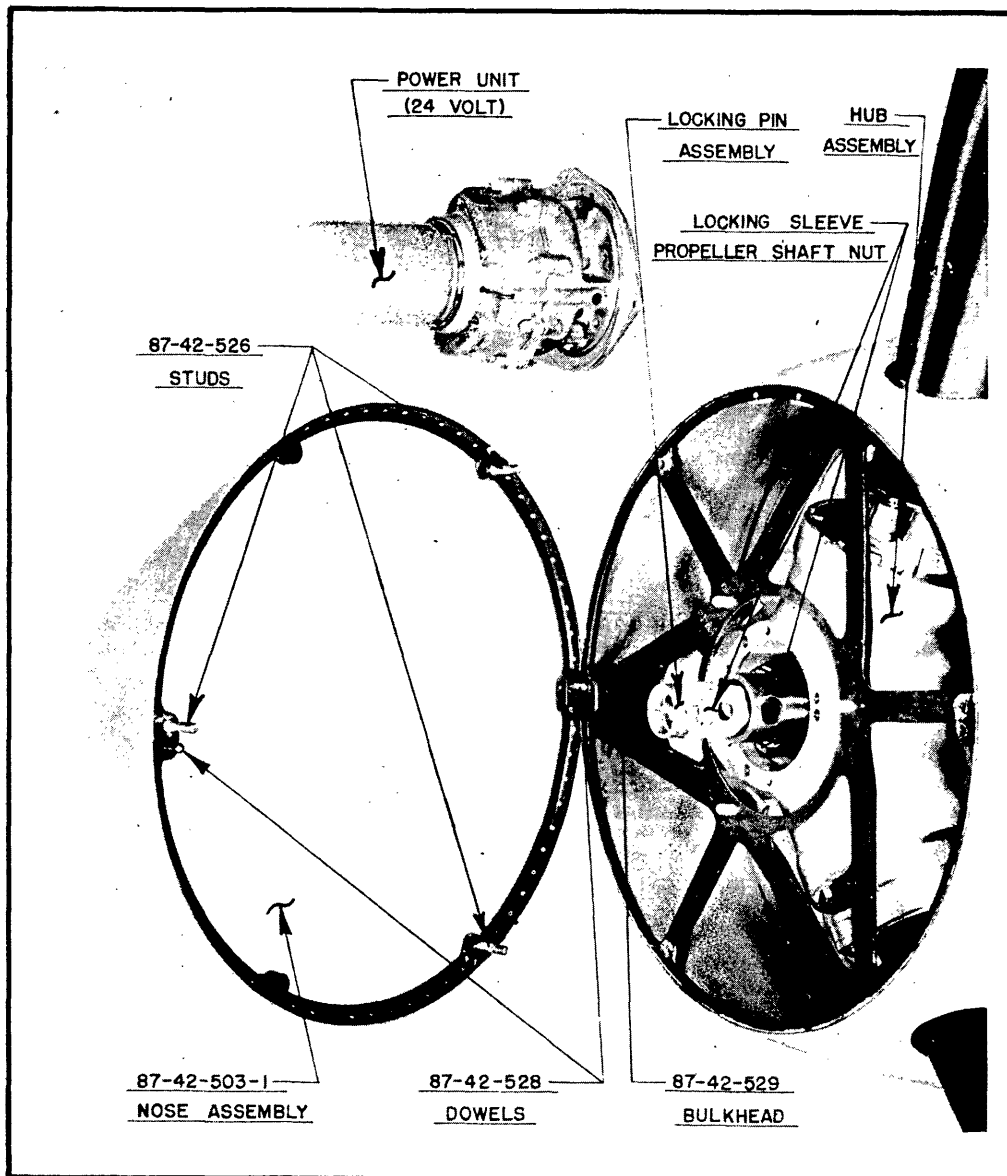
Propeller Assembly - Power Unit & Locking Devices
